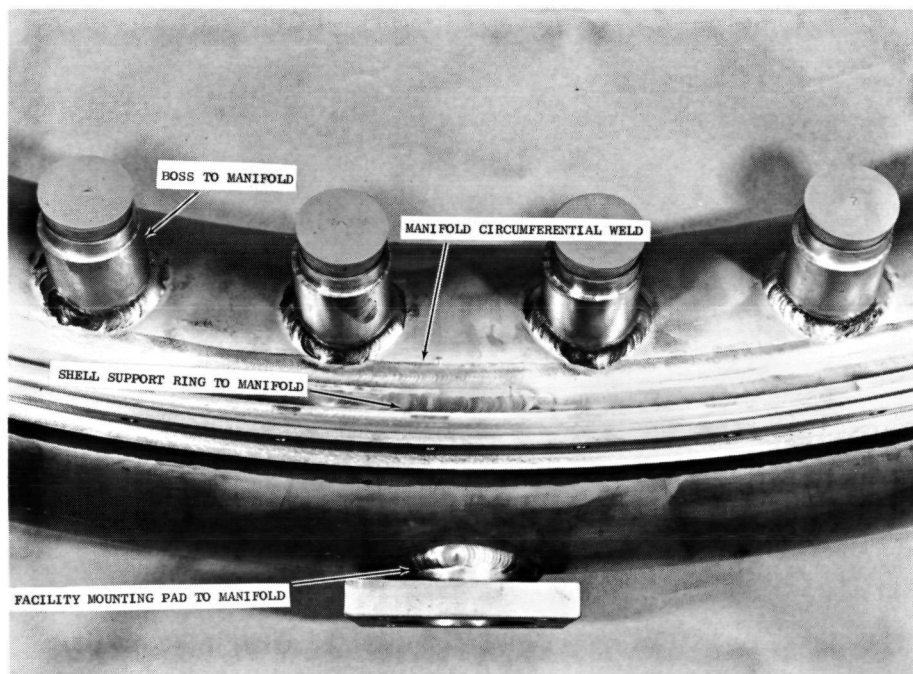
Inlet Manifold - Typical Weldments Required During Fabrication. (P69-9-10D)
